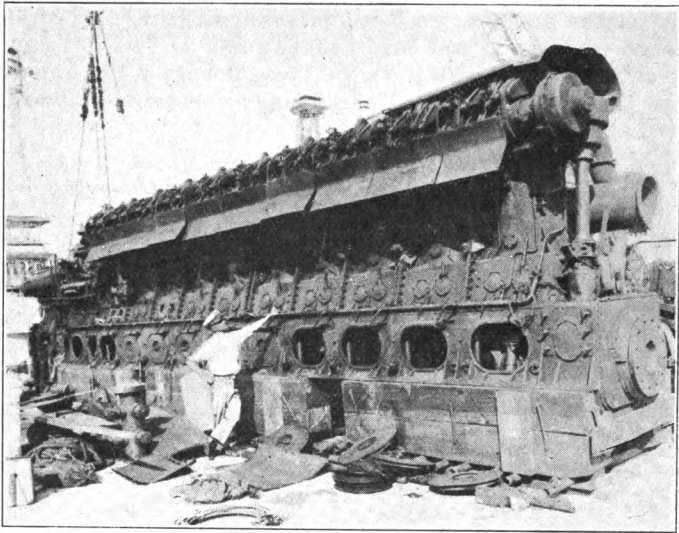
VIEW OF THE 3000-HP. ENGINE WHICH WEIGHS 14,000 LB.
